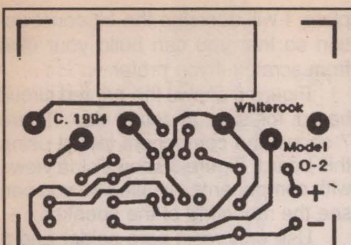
Code Buddy Printed Circuit Board — Actual Size.
